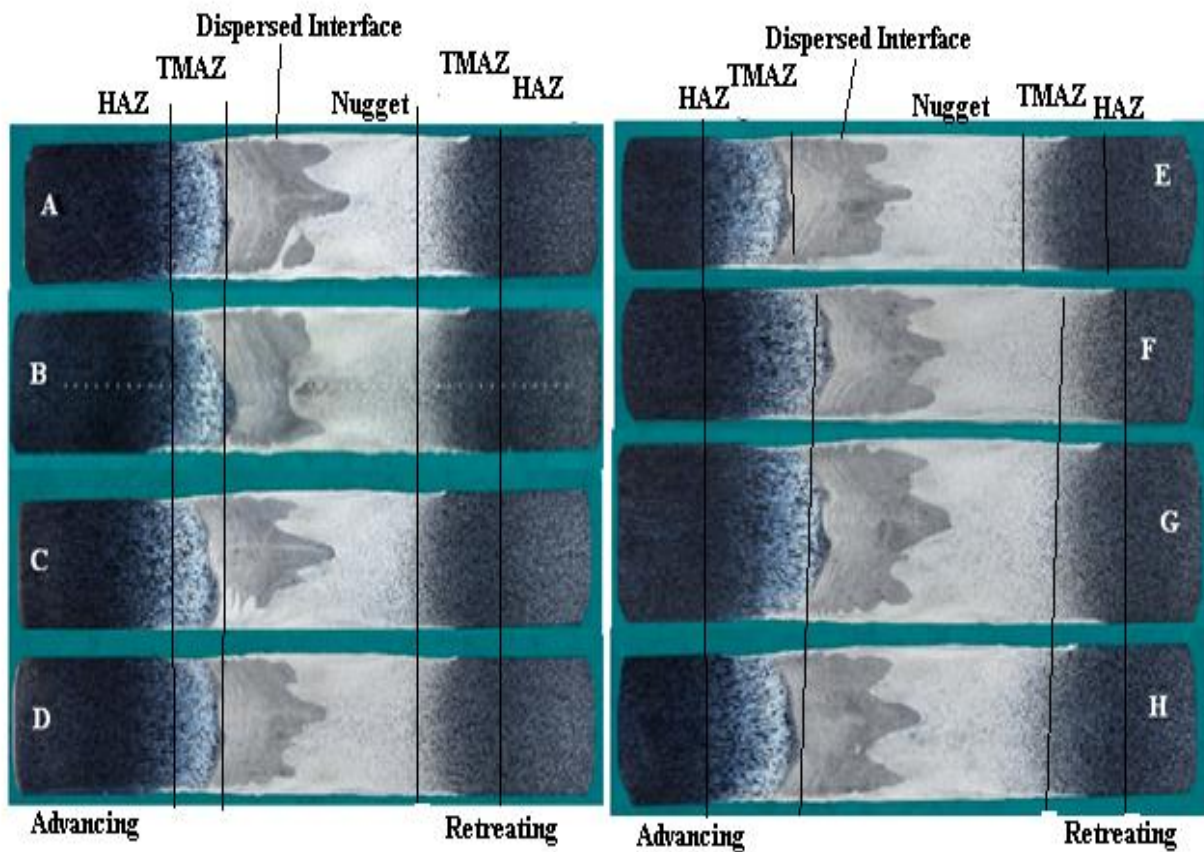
Macrographs of SR-FSW dissimilar alloys. AA 2014 is on the advancing side and AA 2219 is on the retreating side. All samples were processed with the same weld parameters. (A) CB-179, (B) CB-180, (C) CB-181, (D) CB-182, (E) CB-183, (F) CB-184, (G) CB-185 and (H) CB-186.
